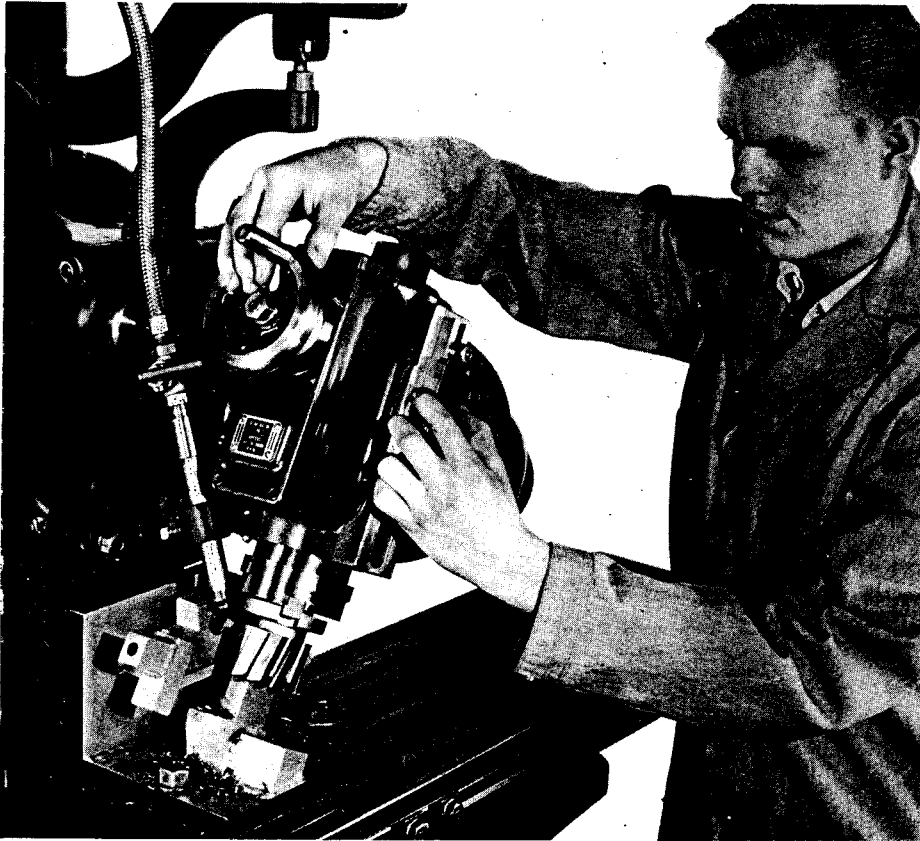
Step milling assures accuracy when milling surfaces or boring holes to relative heights or depths.
